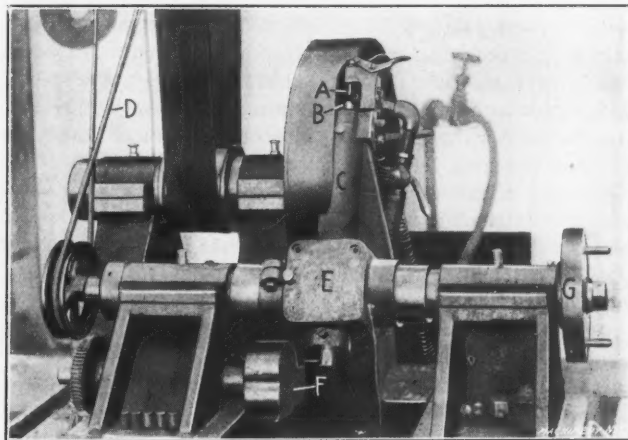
Automatic Grinder in which Bearings are rough-ground
